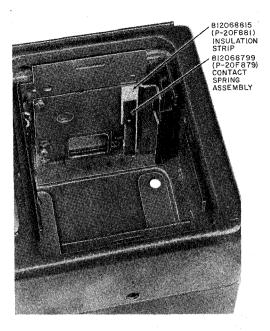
♦Installation of Insulation Strip and Contact Spring Assembly♦
